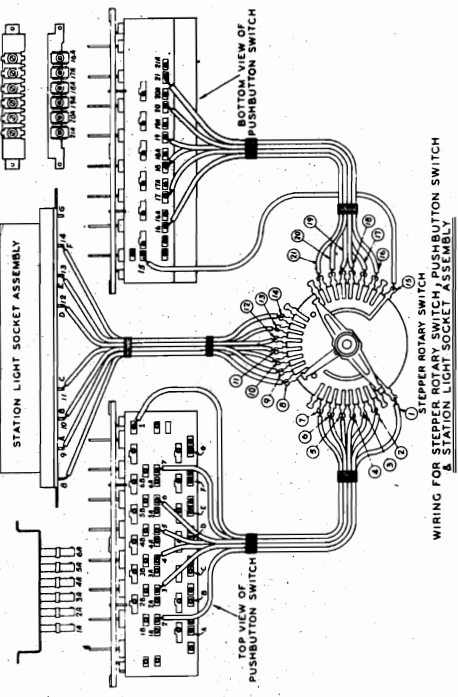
CABLE WIRING FROM STEPPER ROTARY SWITCH TO 5. PUSH-BUTTON SWITCH AND STATION LIGHTS
